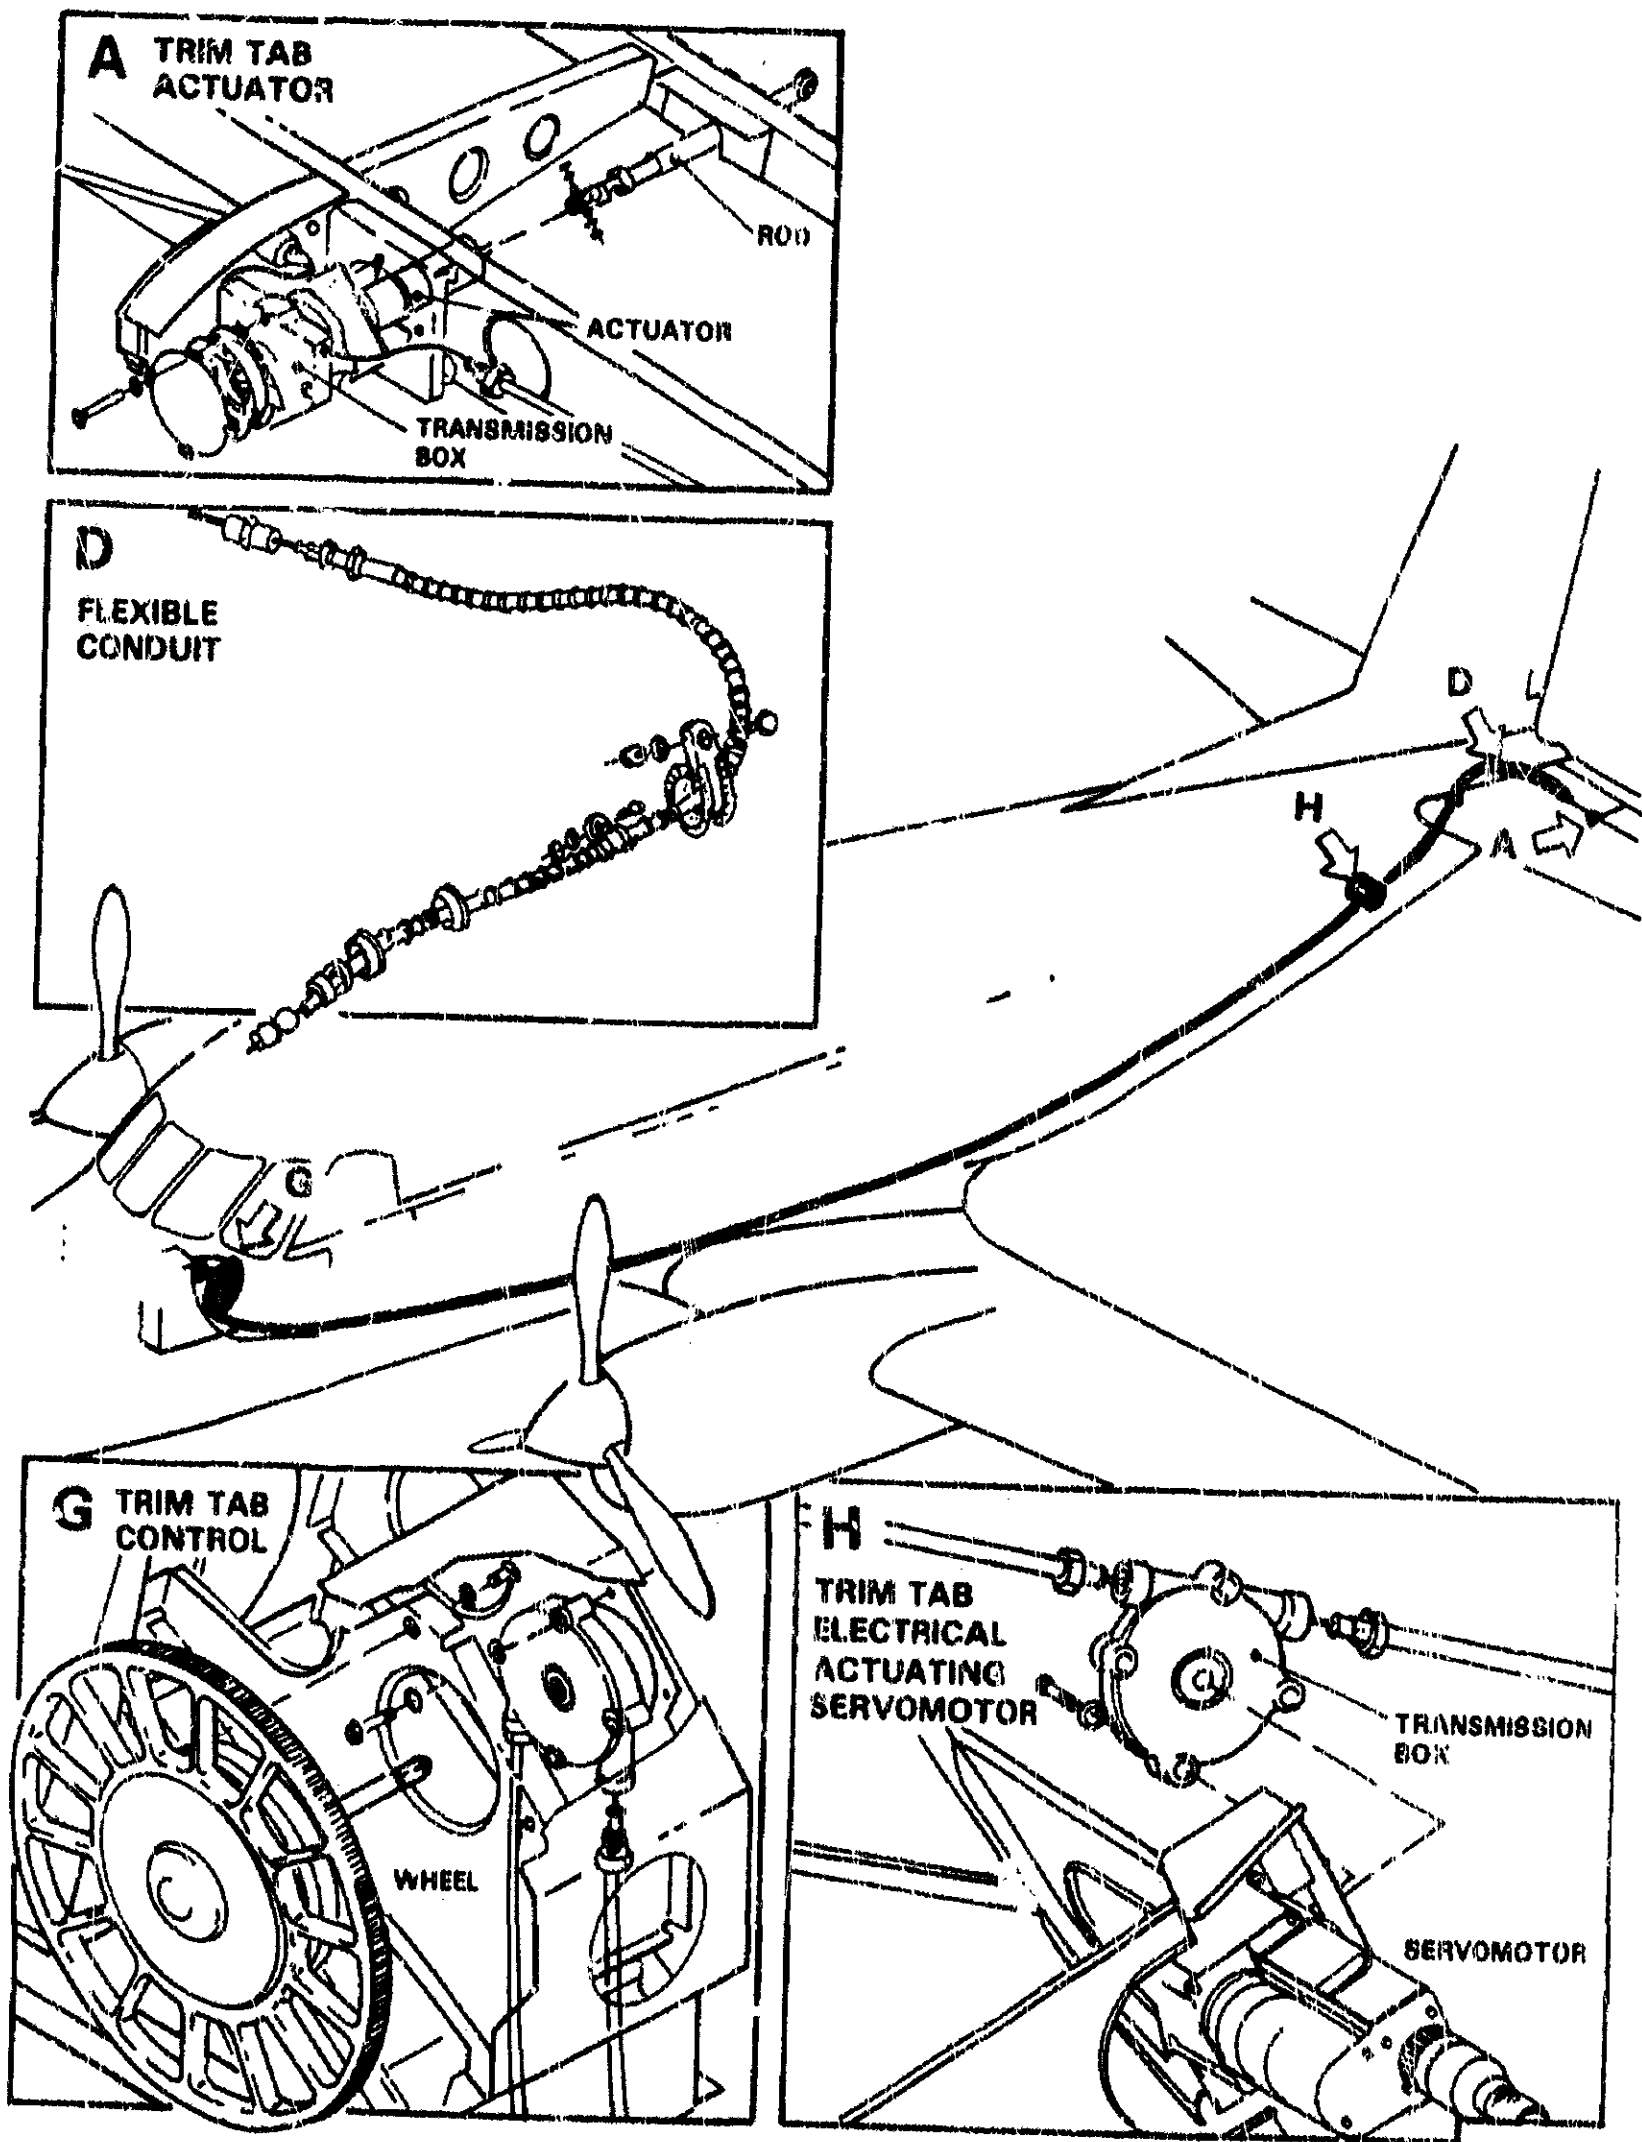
Bandeirante EMB-110P1 trim tab actuator assembly.
